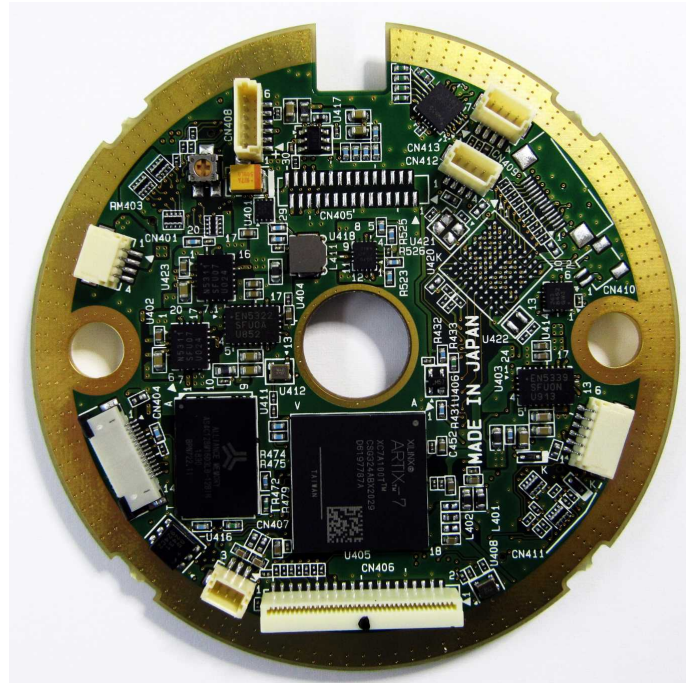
DS-SENSOR-B0140-01_PCB_Photo_PartsSIDE
